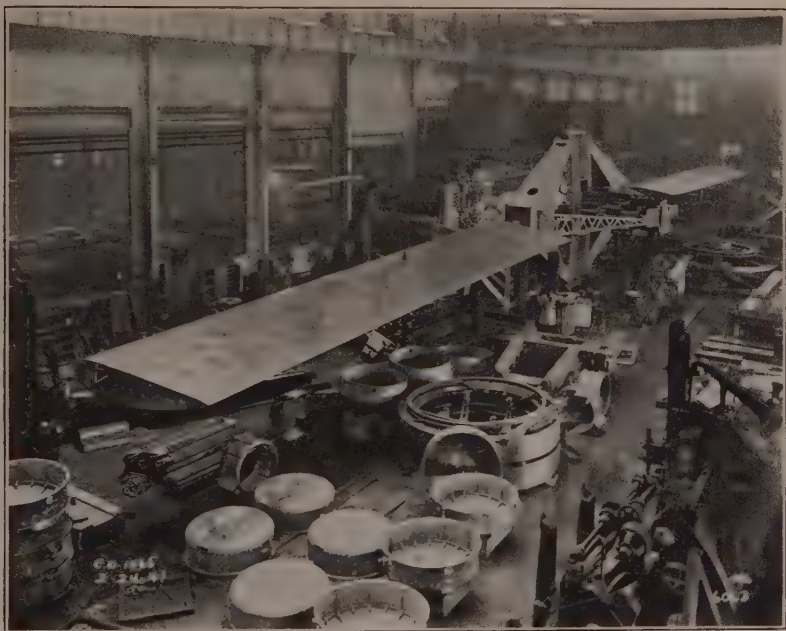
SHOP ASSEMBLY AT THE WELLMAN ENGINEERING CO.
